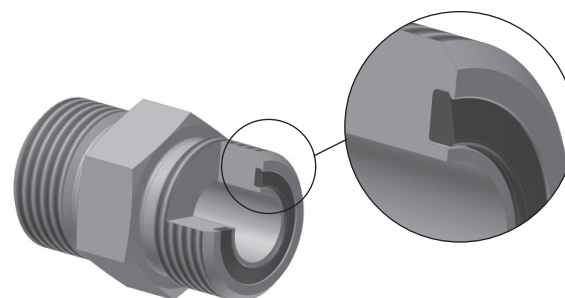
Captive O-ring Groove (CORG) Cutaway with Parker's Trap-Seal
